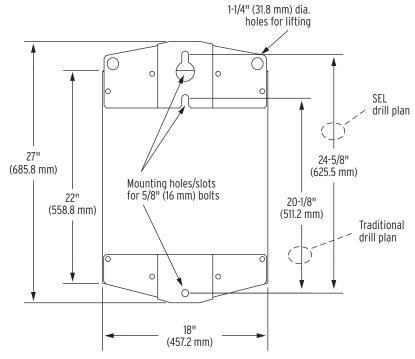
SEL-351R Recloser Control Dimensions and Mounting Drill Plan (Lift-To-Open Enclosure)
